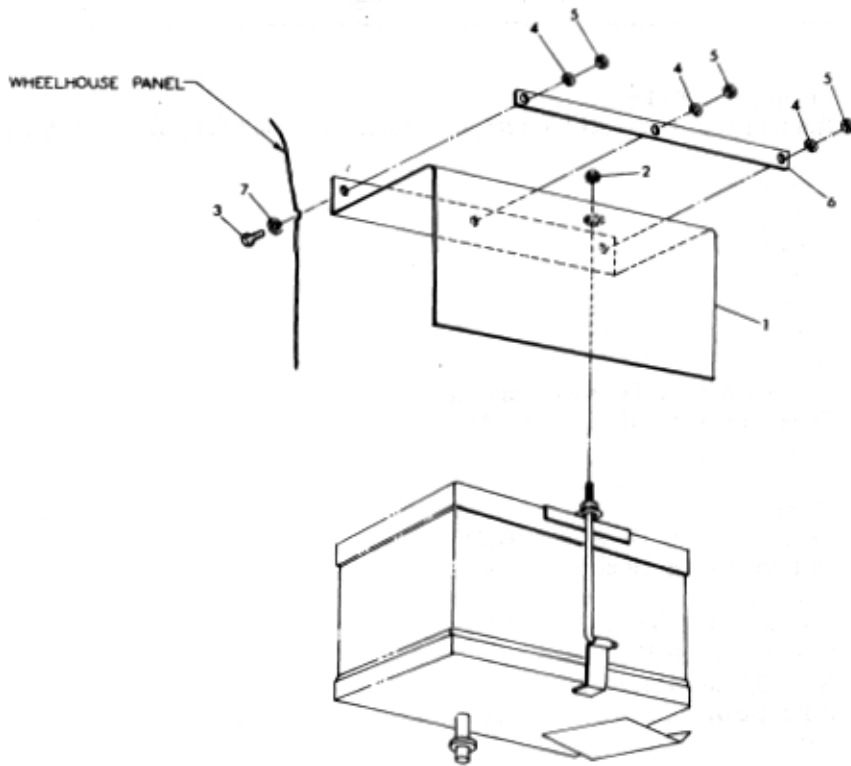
Shield Assembly .Rear Mounted Battery, 6 & 8 Cylinder .120 WB
